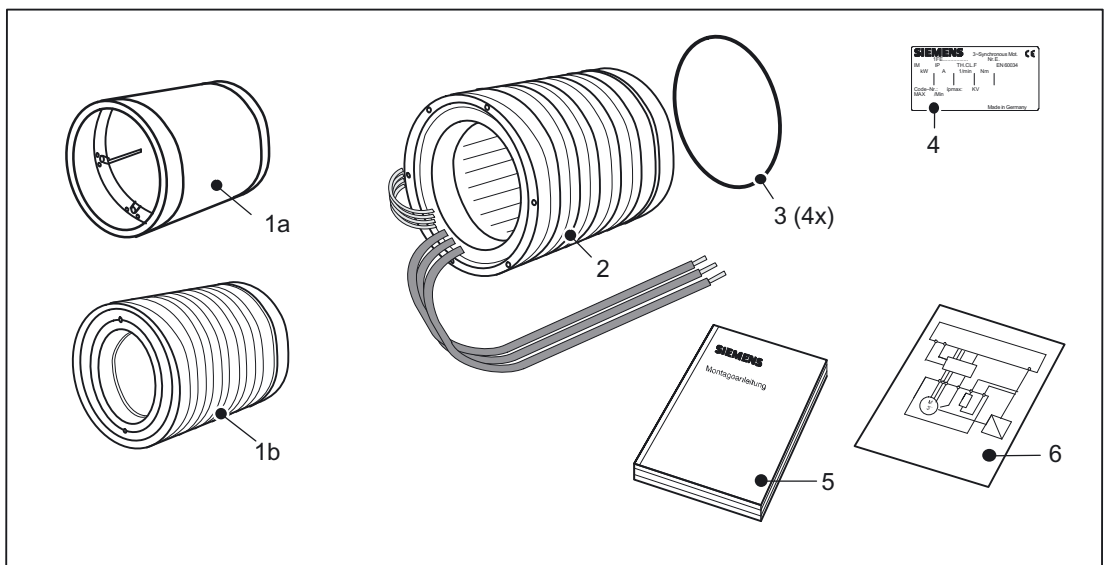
Scope of supply of the 1FE1 built-in motor
